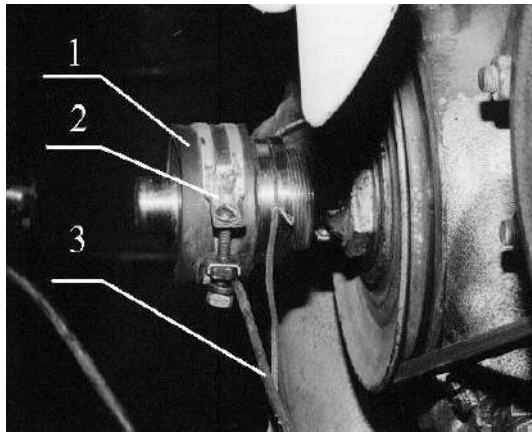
Fixing the crankshaft main bearings with soldered wires
